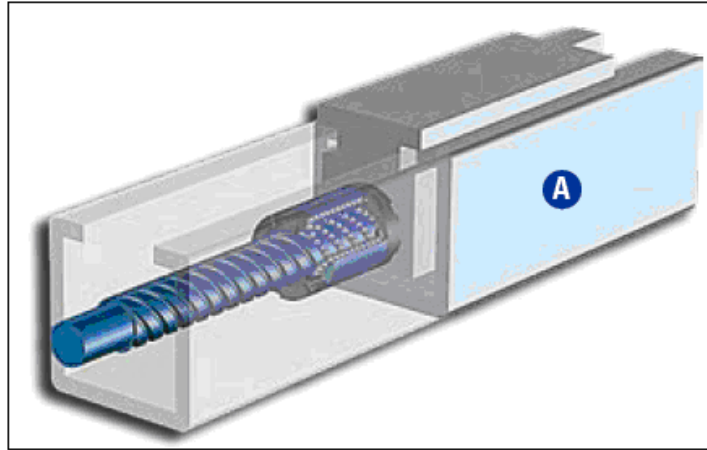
4 Screw Driven Linear Unit – DANAHER motions producer
